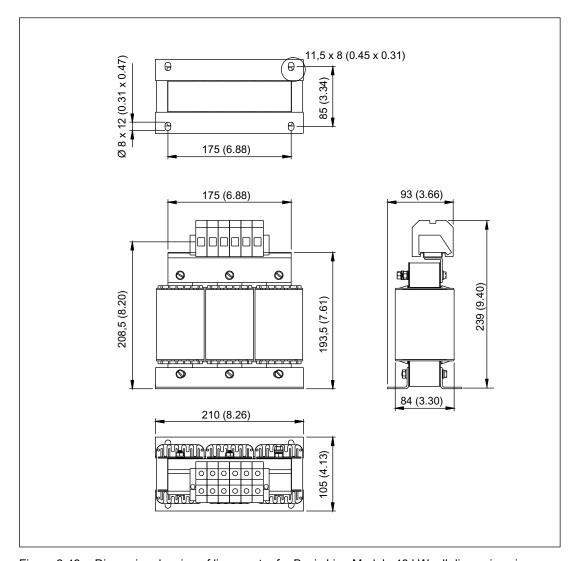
Dimension drawing of line reactor for Basic Line Module 40 kW, all dimensions in mm and (inches)
